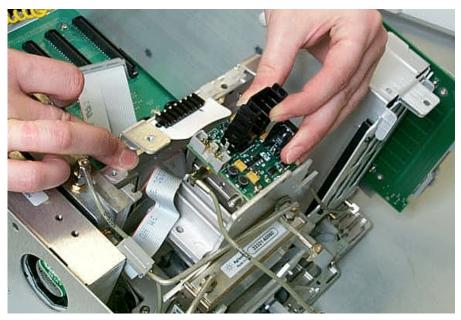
YIG Tuned Mixer Cables and Screw Locations
